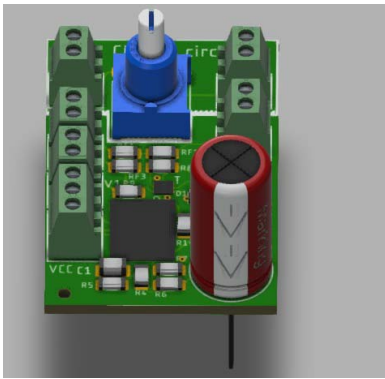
PCB design of the circuits by using EAGLE. Both circuits were designed on the same PCB.
